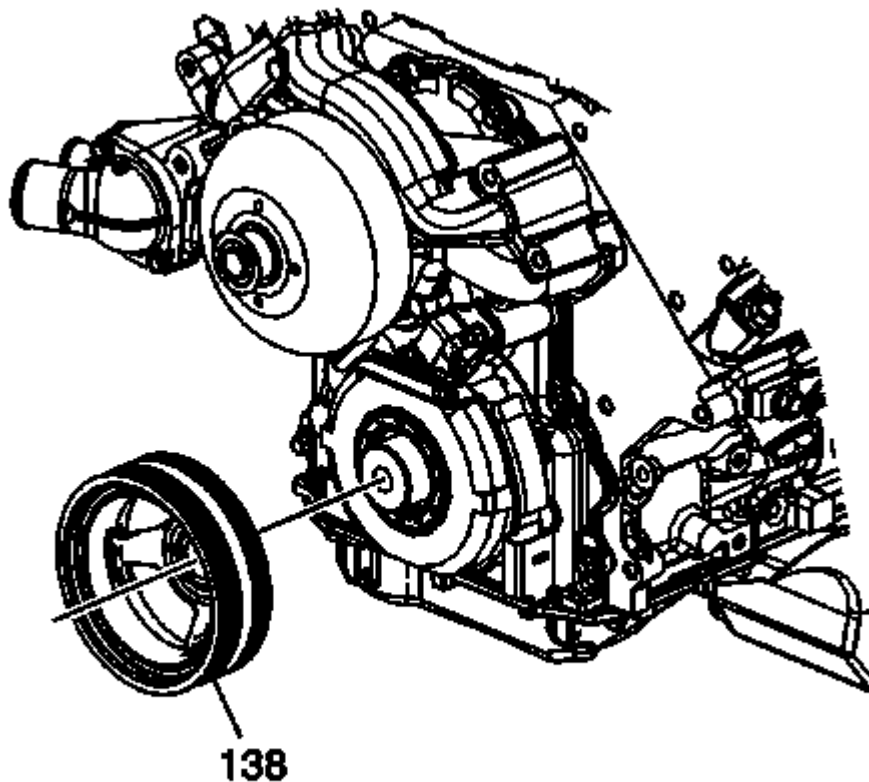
View Of Crankshaft Balancer Bolt
